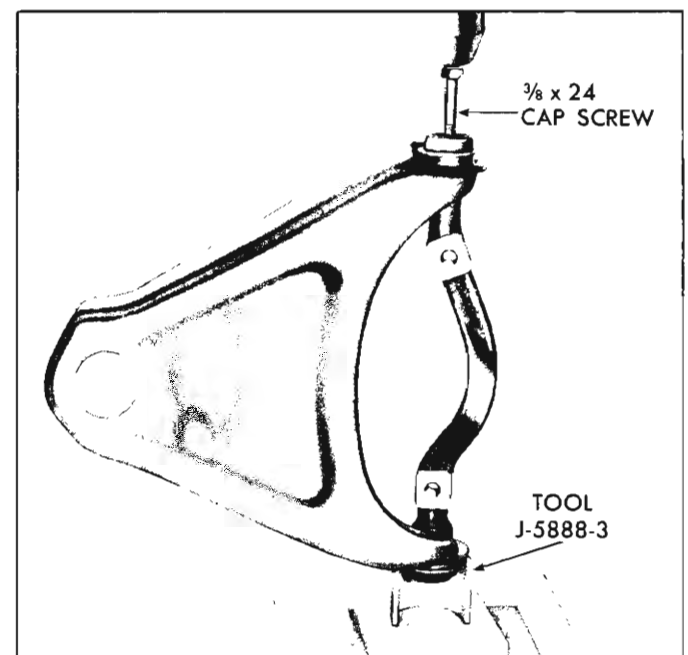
Removing Upper Control Arm Cross Shaft Bushings
